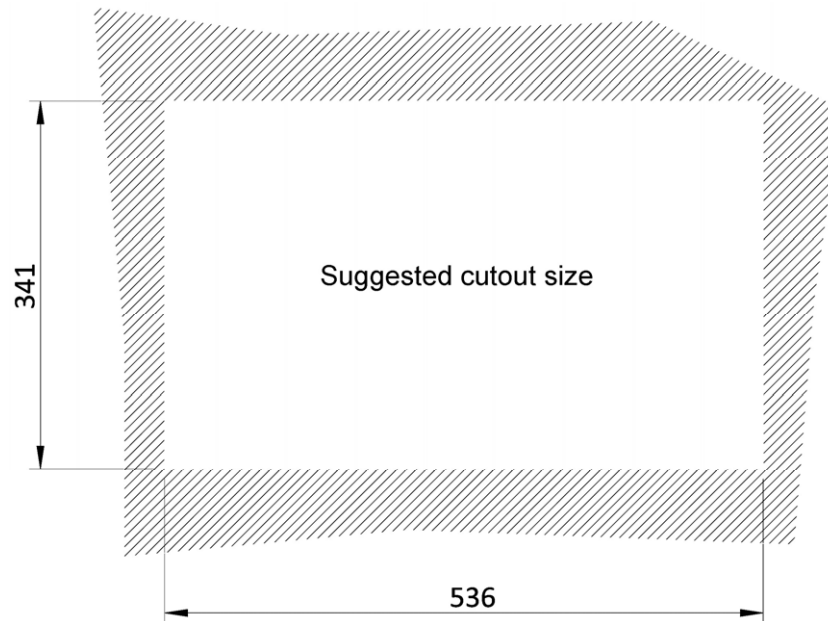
PPC-F22A-H81 Panel Cutout Dimensions
